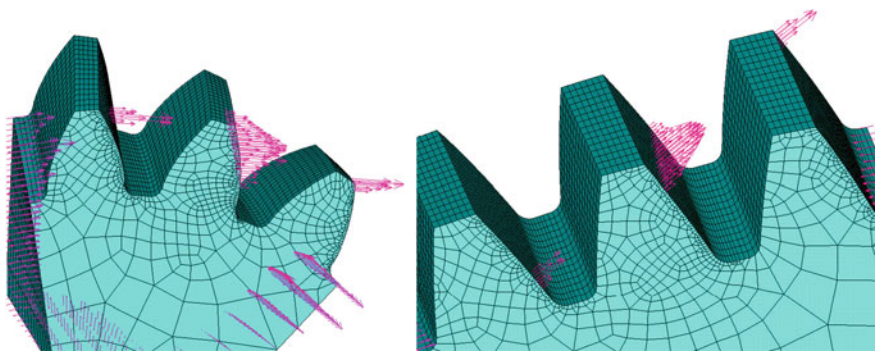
Contact forces on the pinion tooth and the wheel tooth
